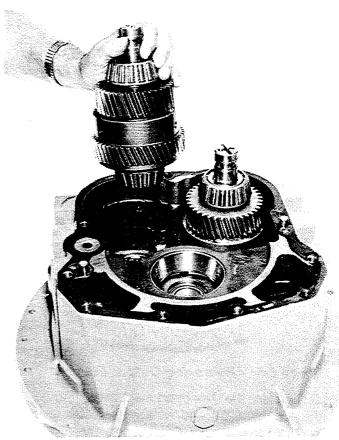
Removing or Installing the Reverse Clutch Assembly.
